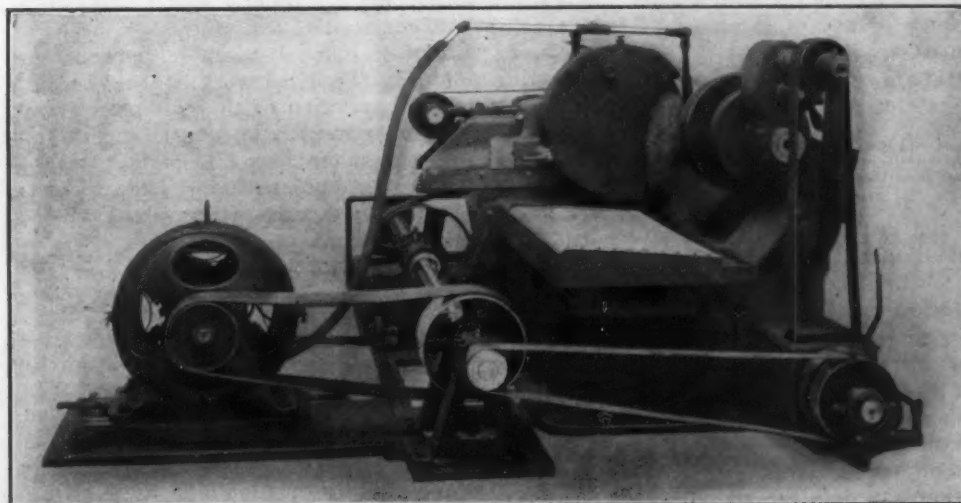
End View, Showing Motor Drive. A New Heavy Duty Self-Contained Grinding Machine Built by the Landis Tool Company, Waynesboro, Pa.
